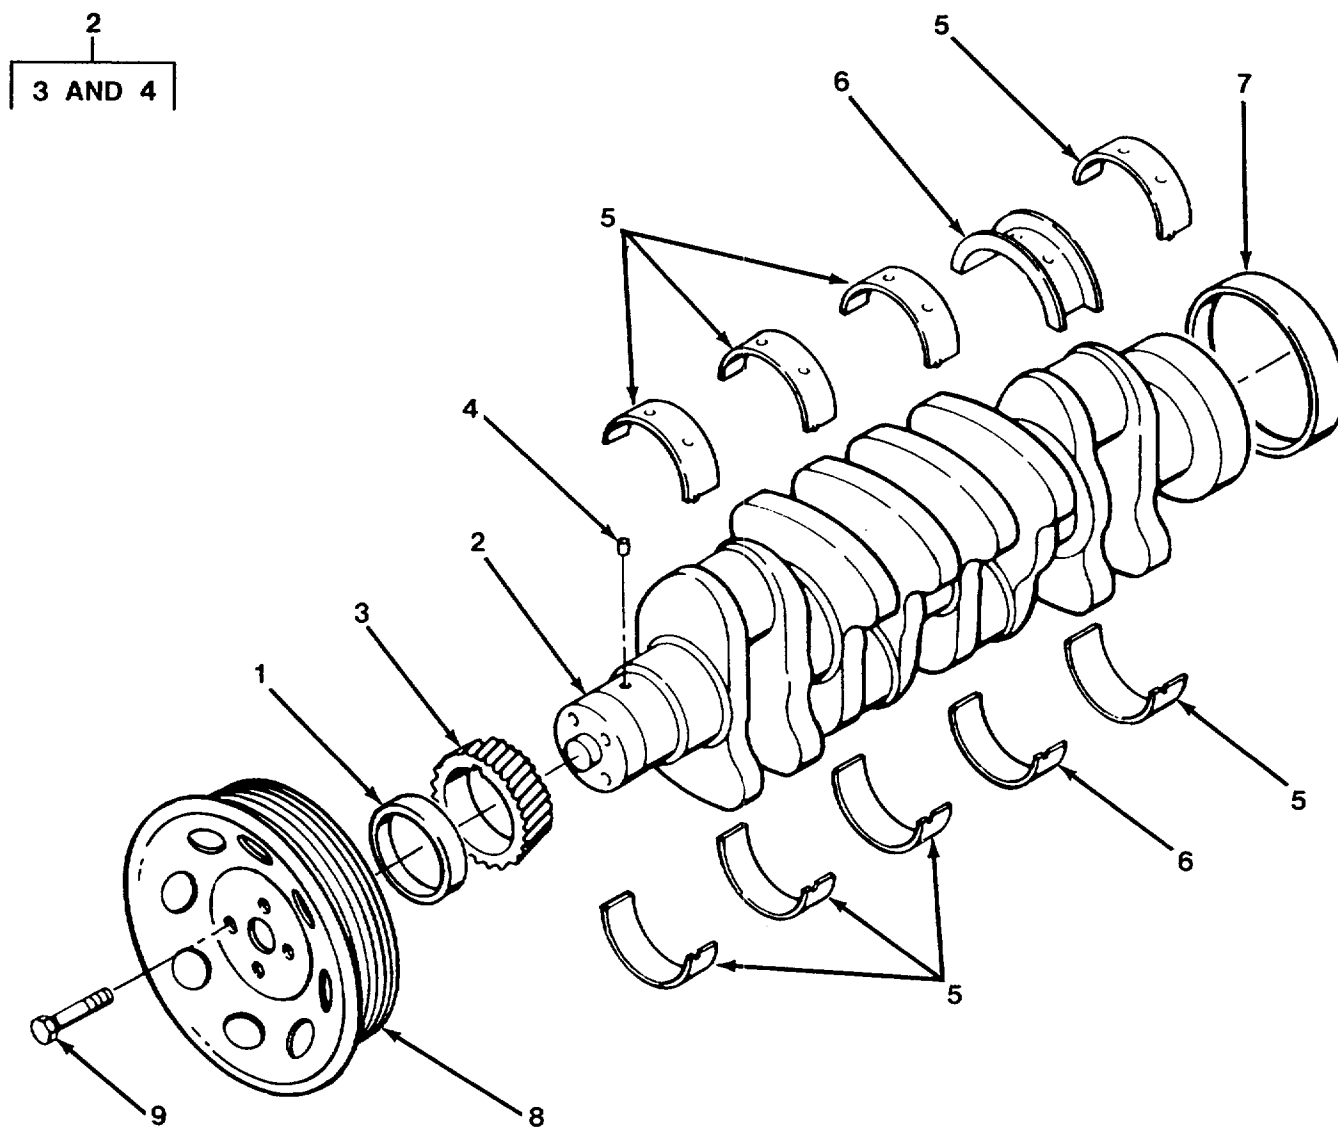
CRANKSHAFT AND FRONT DRIVE ASSEMBLY
